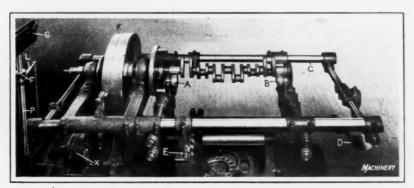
Crankshaft in Position for checking the Balance of the Flywheel End
